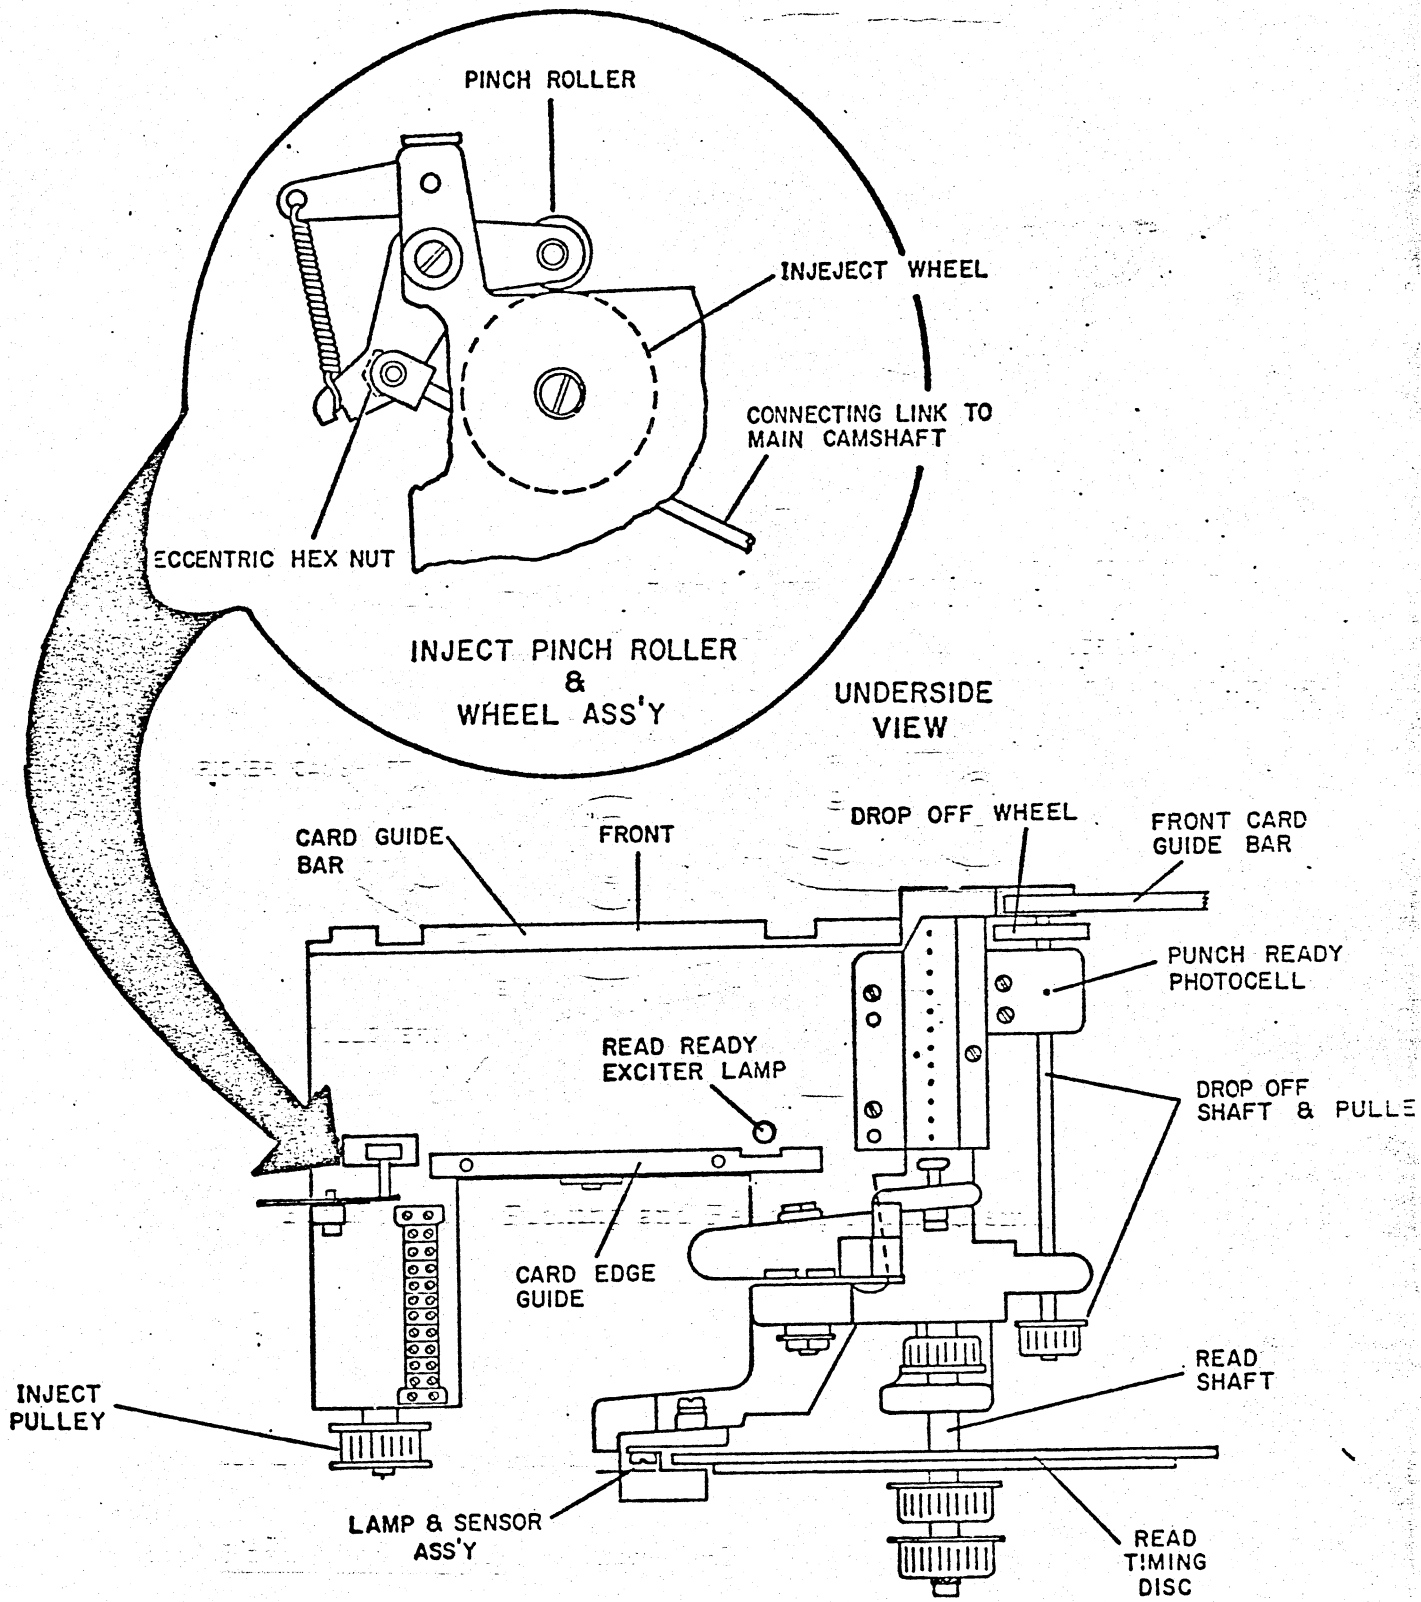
Read Ready and Read Stations - Mechanical Arrangement
